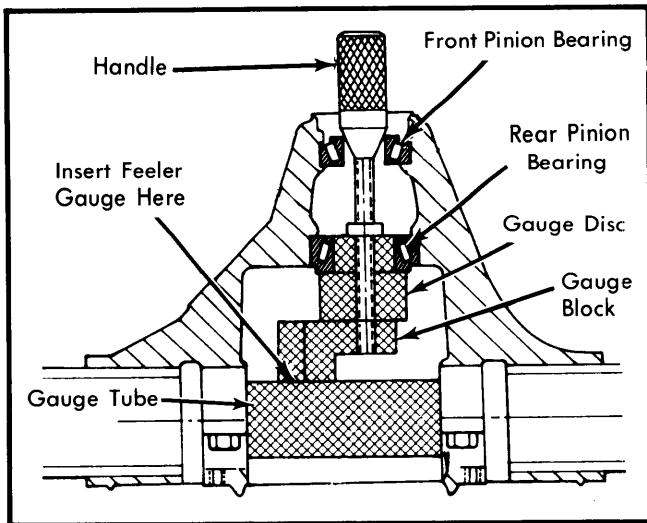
Sectional View Showing Installation of Pinion Depth Measuring Tools
